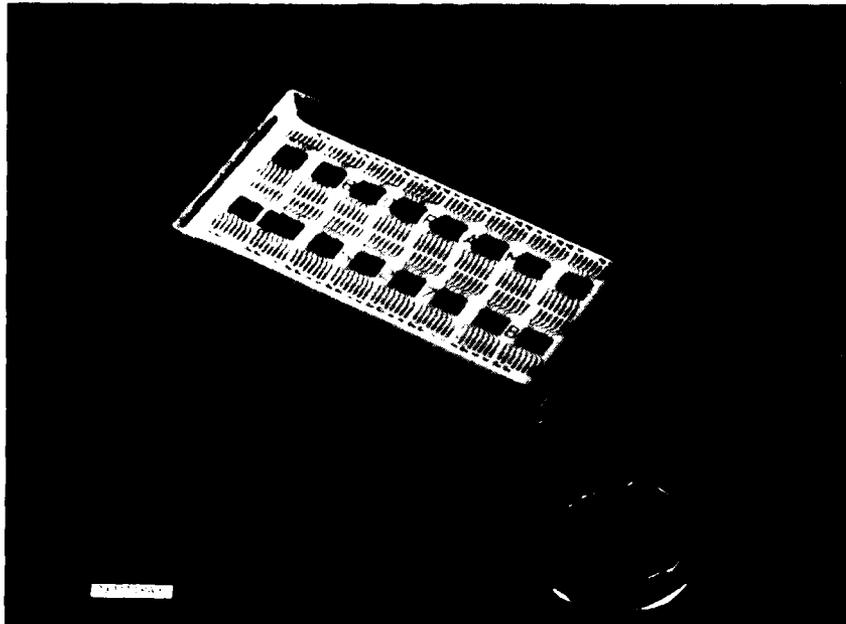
Tape Carrier Bonded BORAM Hybrid
